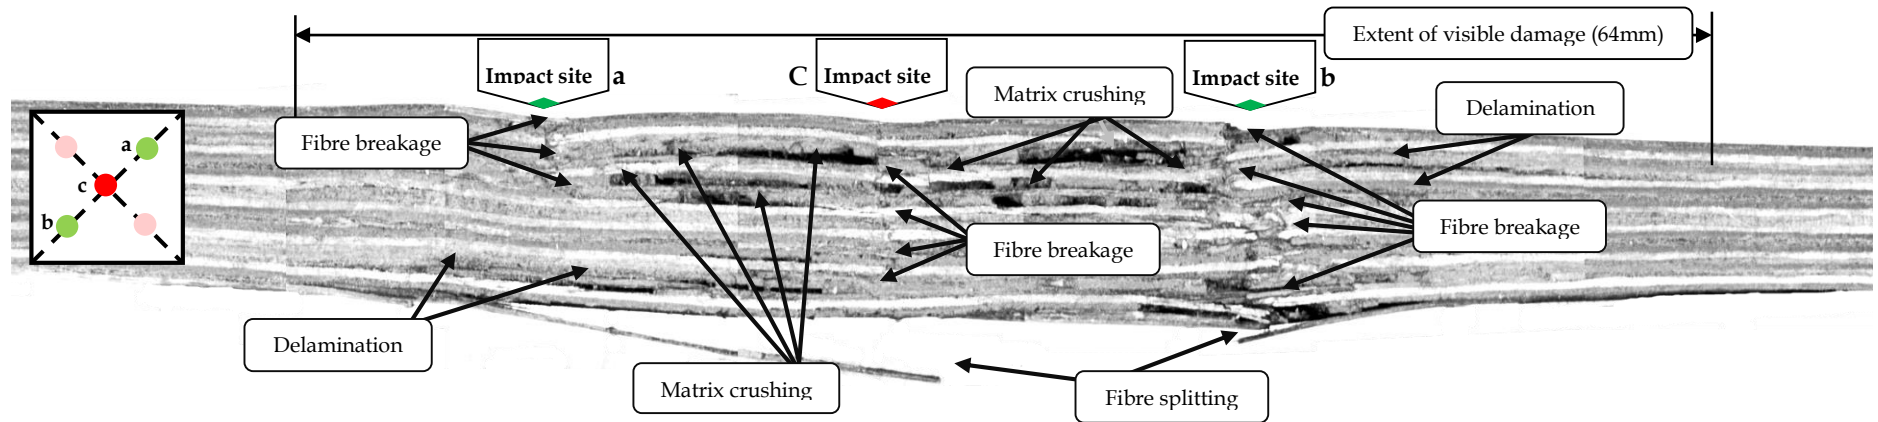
Fractography of positive specimen; Impact along the damage direction
